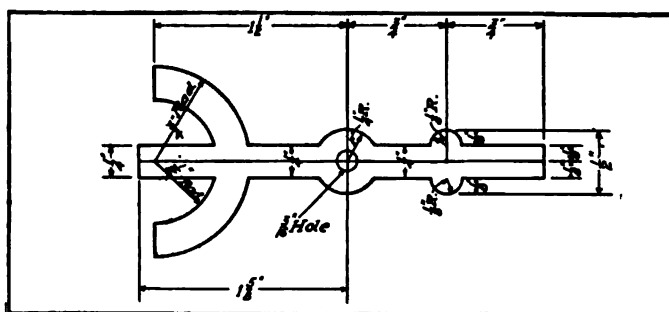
Sketch of Lower Punch of Die Shown in Fig. 43
